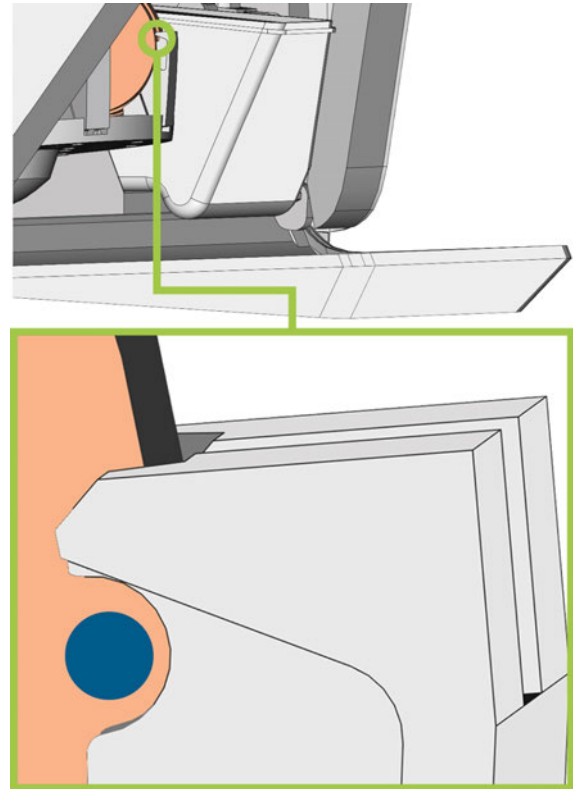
THE MARKING FOR REMOUNTING (BLUE CIRCLE) LIES IN THE OPENING IN THE CLAMPING LEVER
